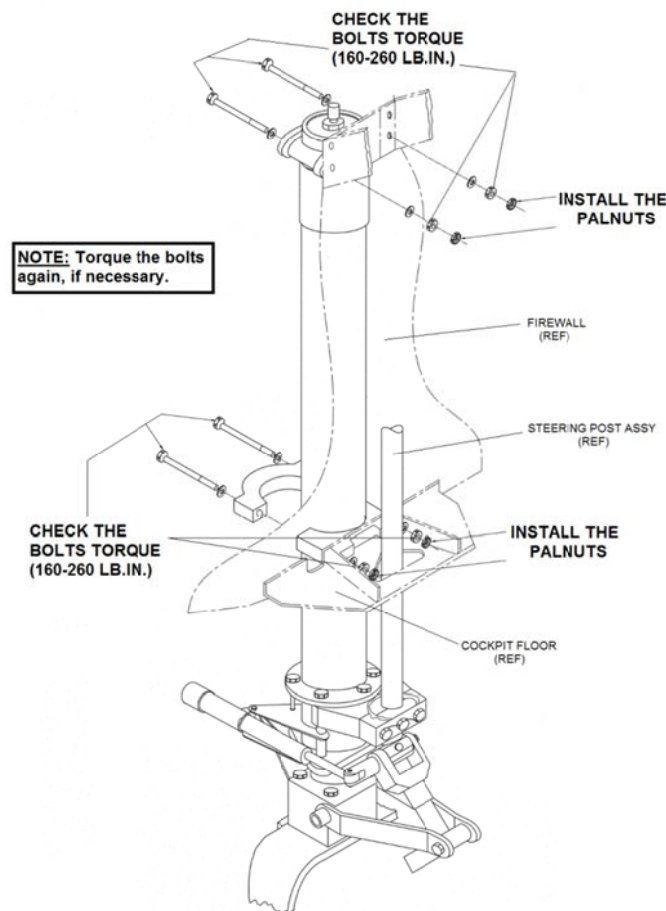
NOSE LANDING GEAR – TORQUE CHECK AND PALNUTS INSTALLATION
